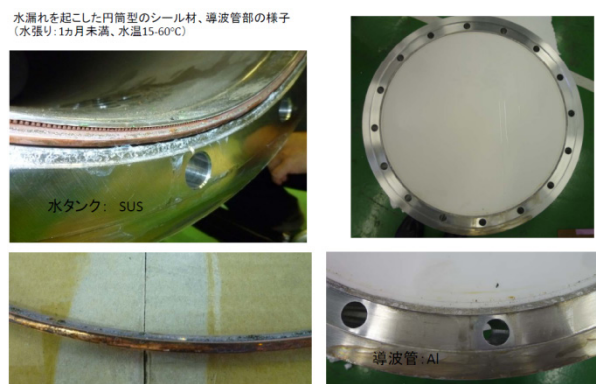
Disassembly of a cylindrical-type after high-power test to check a water-leak.
